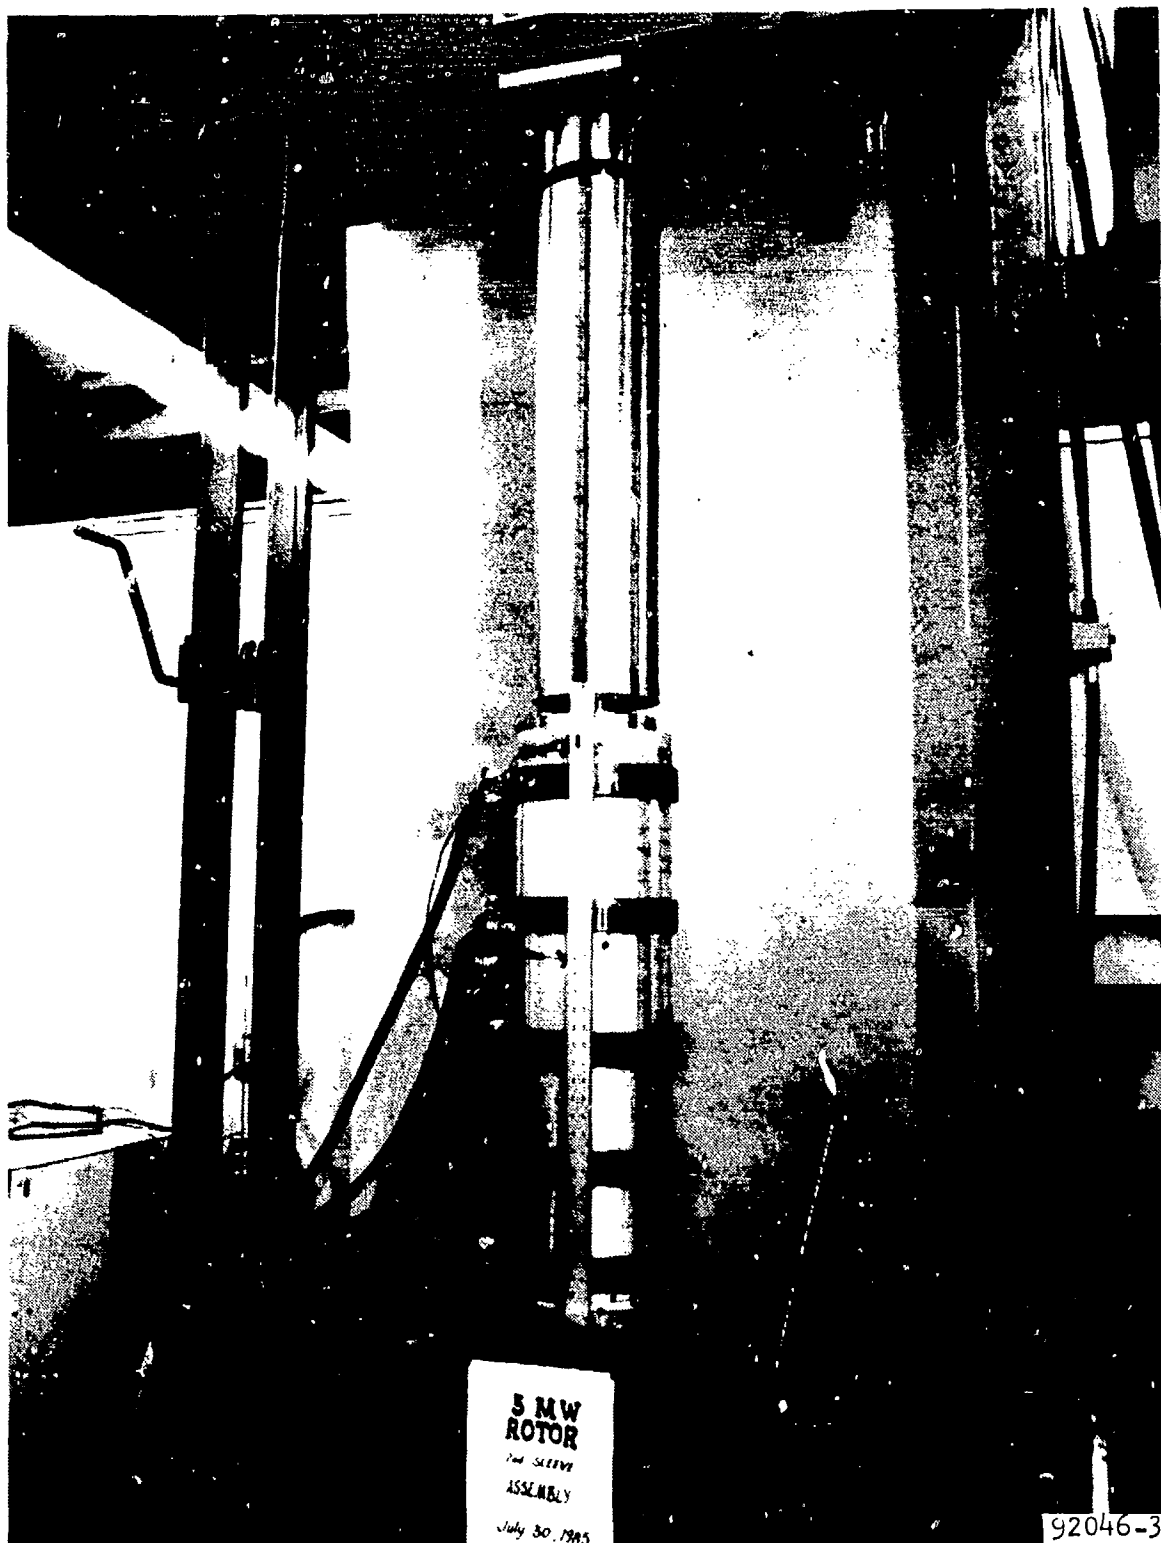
Rotor and Heat Sink Prior to Installing Insulation
